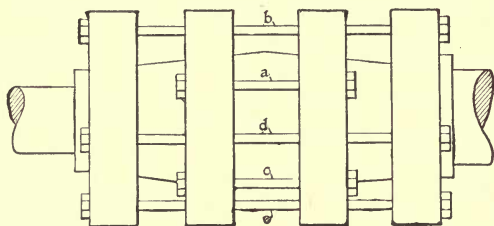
DEFECTIVE BOLT ARRANGEMENT IN A COMPRESSION COUPLING.
